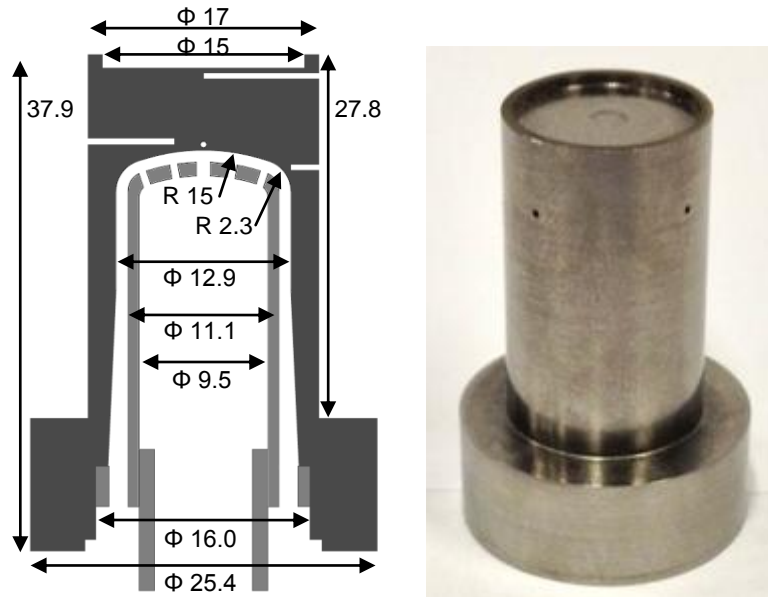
Cross-sectional drawing of the HEMJ test section thimble and jet cartridge (left) and an image of the complete test section thimble (right). The dimensions are given in mm
